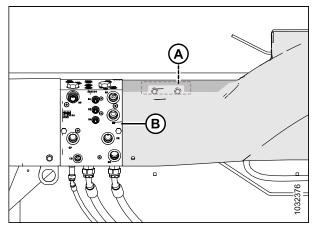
Left Outboard Linkage Cover – View from Rear of Header
